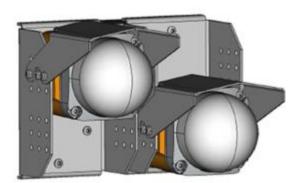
Two LPR®-1DHP-200 mounted in the diversity mounting bracket.
